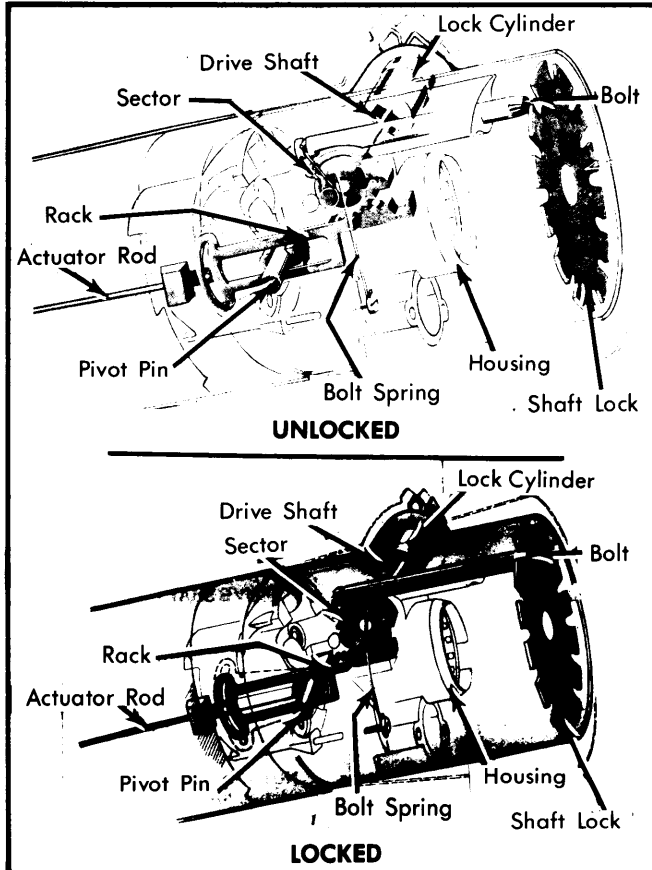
General Motors Steering Column Locking Mechanism (Others Similar)
